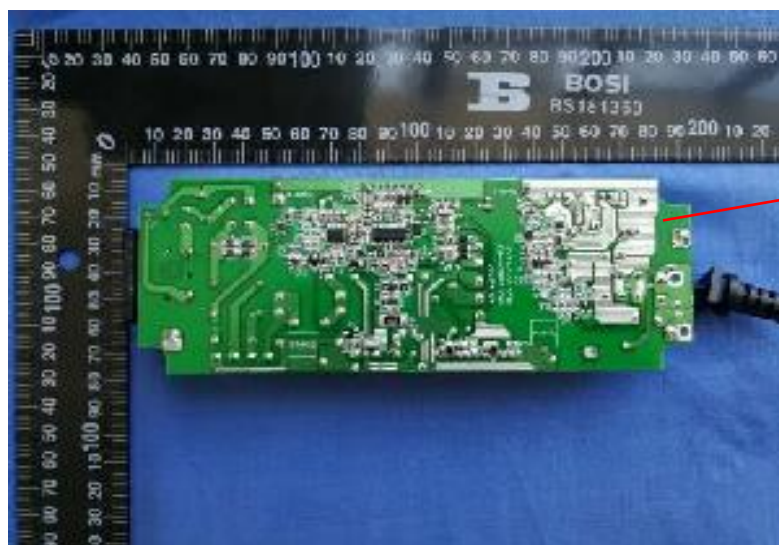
PCB Bottom Side(12.0-36.0V model, Class II)
